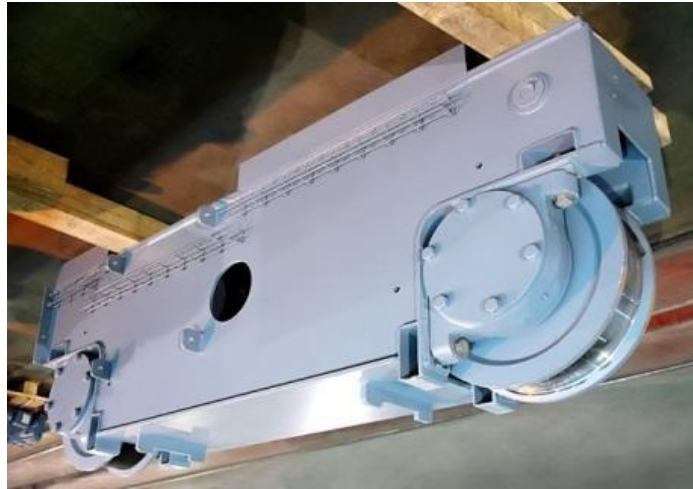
Attachment of axle boxes with running wheels to the end beams of a double-girder overhead crane (photo by the authors)
